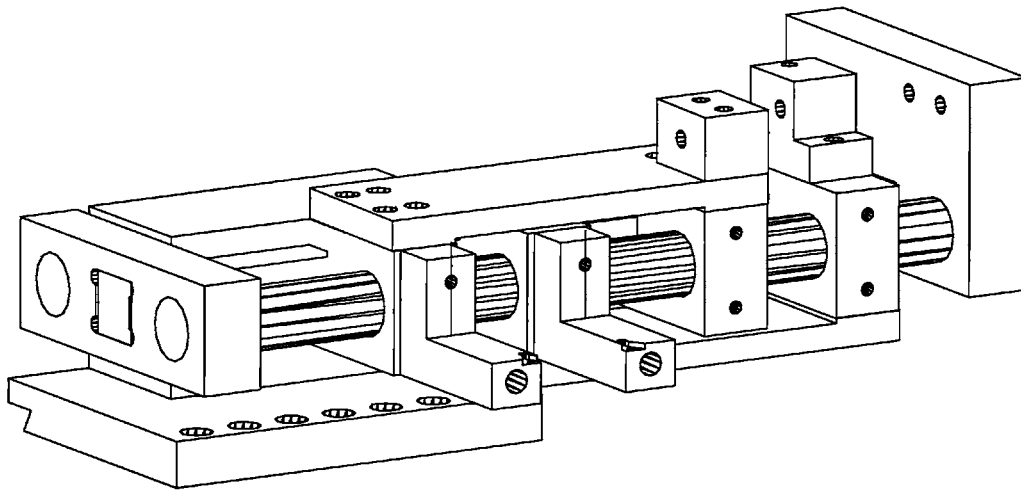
Prototype 1: assembly of the first cutting-head prototype
